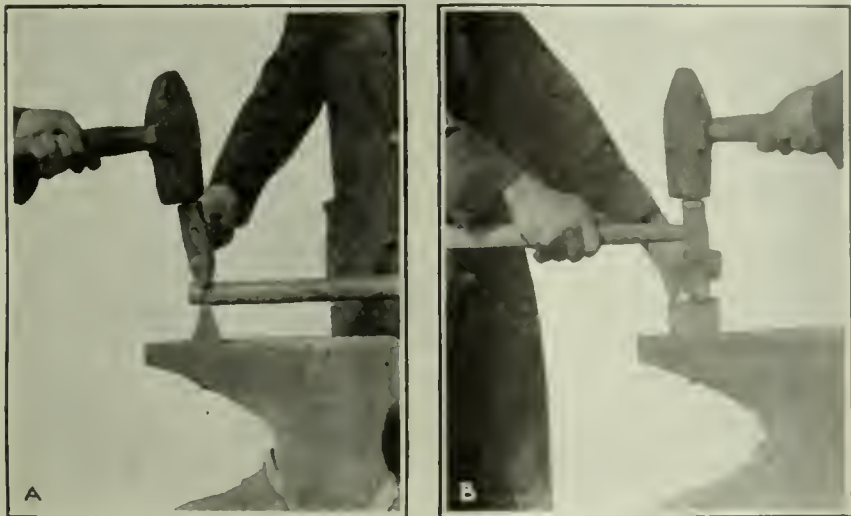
TOOLS USED FOR MAKING ROUNDED GROOVES
